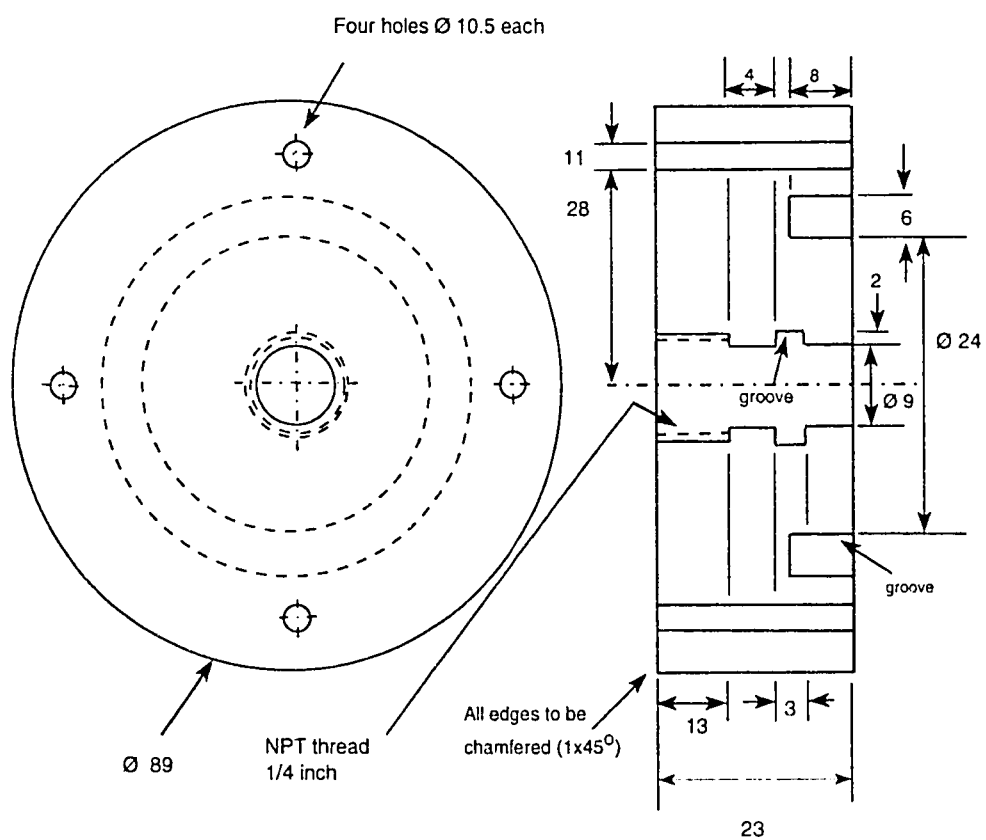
Drawing of plate A of 3/8 inch tube heat exchanger
